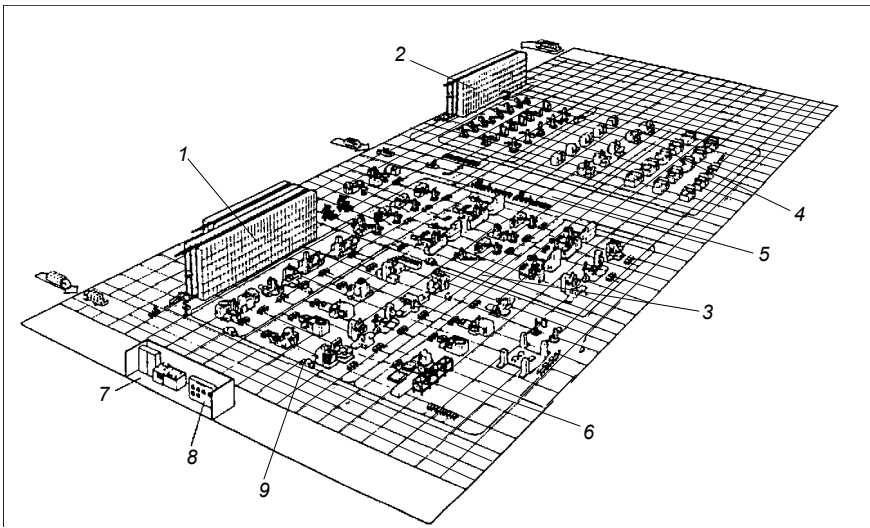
FMS central storage system: 1 - automated high lift rack store for raw material and blanks, 2 - automated part and devices store, 3 - flexible manufacturing system (machining), 4 - flexible assembly system, 5 - production control, 6 - welding, 7 - central FMS control system, 8 - central monitoring system, 9 - AGV
